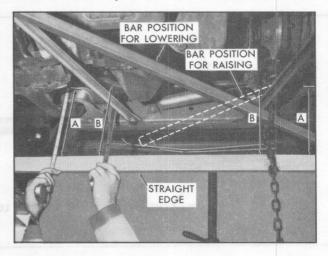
Steering Linkage Parallelism—Eldorado
